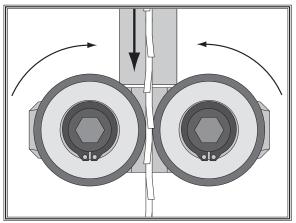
Blade guide bearings evenly and lightly touching the sides of the blade.
